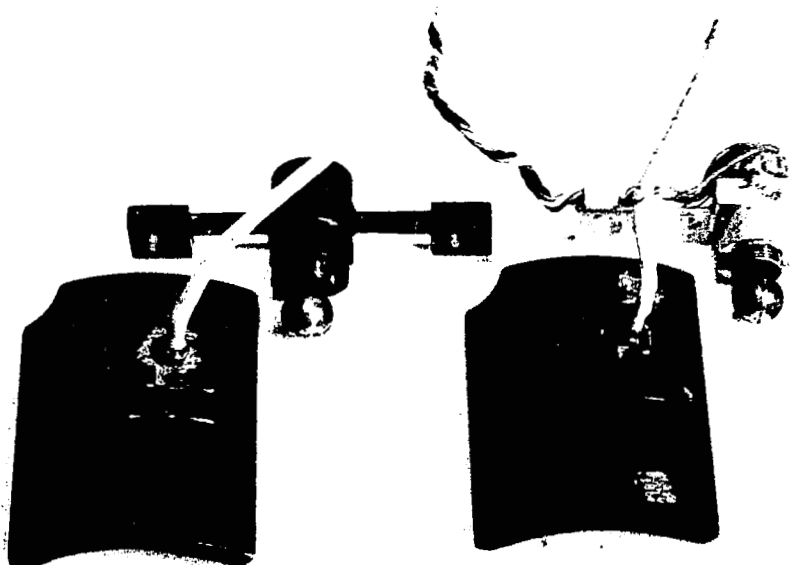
Compressor Journal Bearing Pads, Rear View with Pivots, Inspection 1
